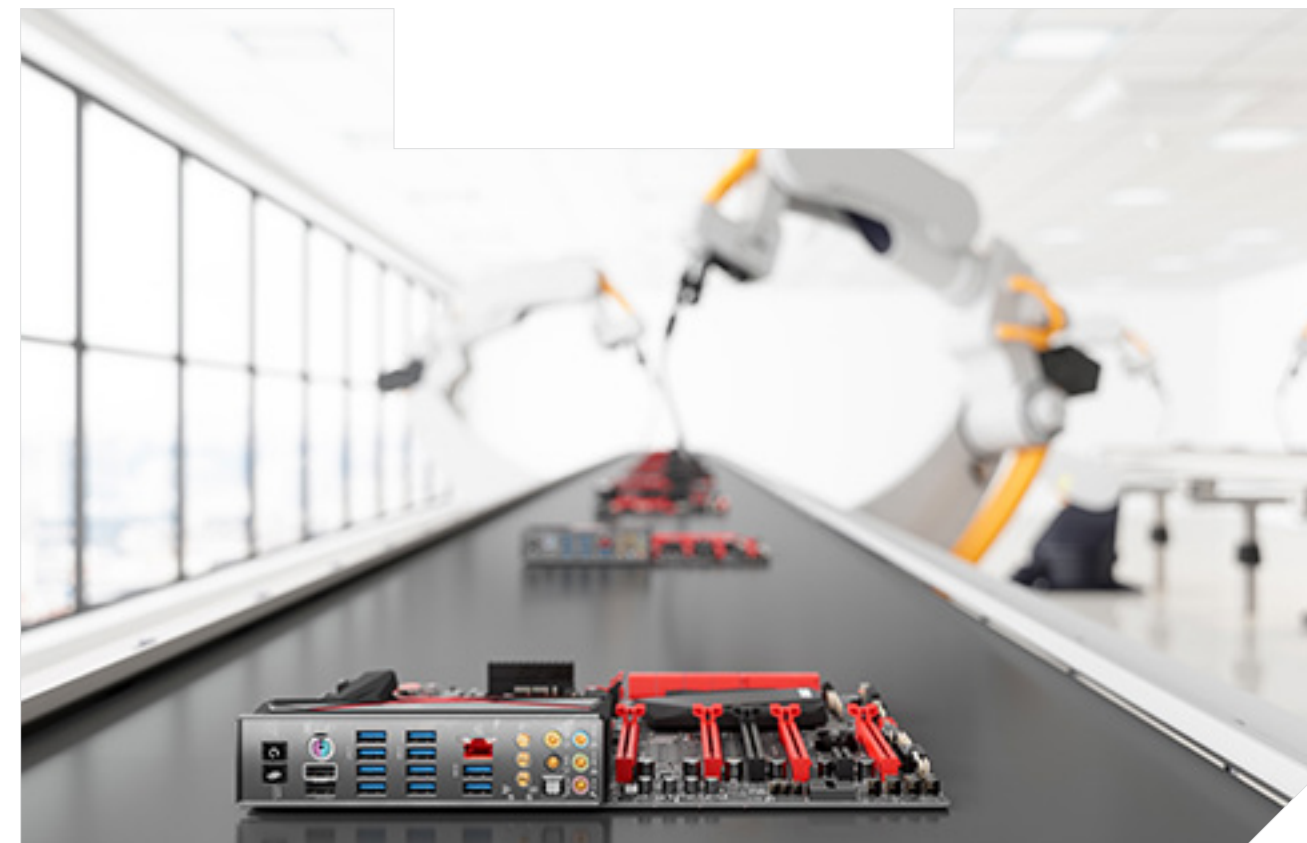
Electronics boards ride a conveyor through an assembly work cell. (Image source: [Getty Images](#))
